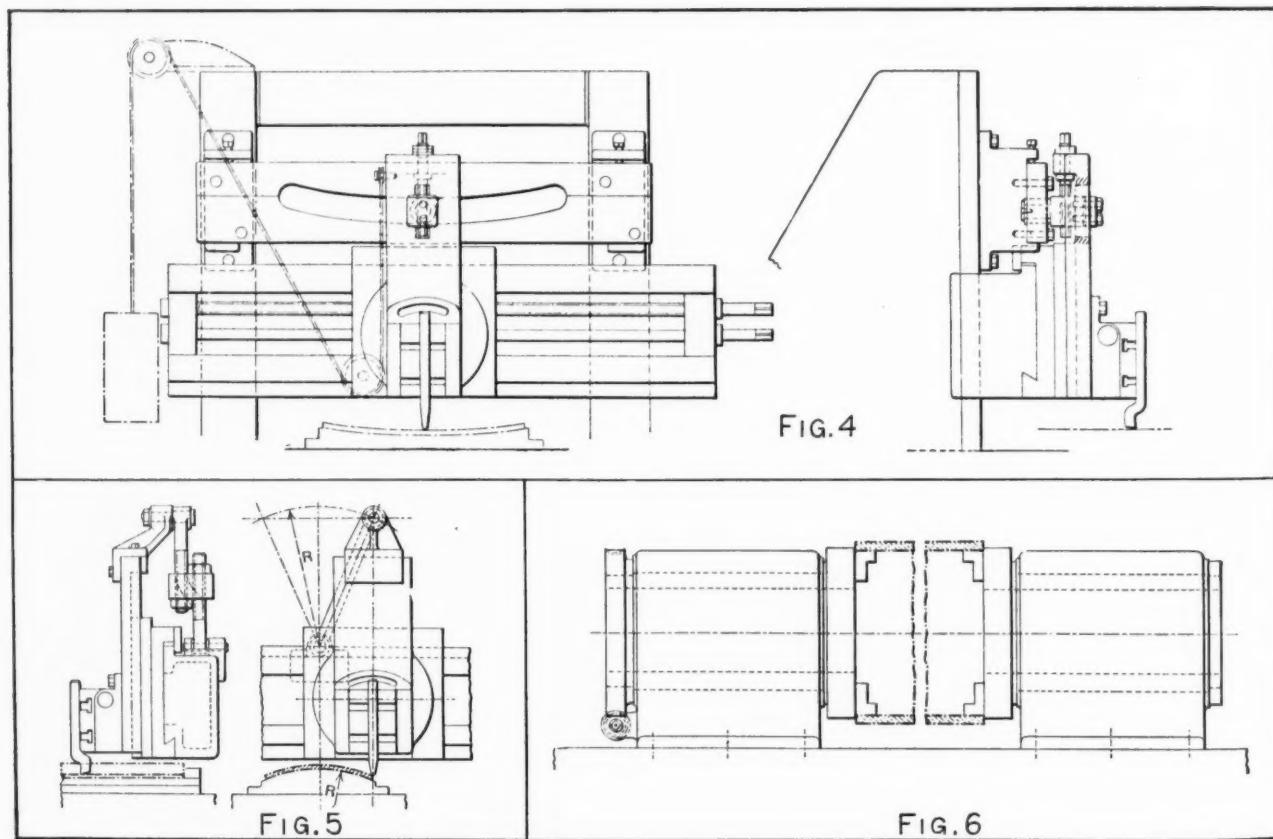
Planer with Former Plate Attachment for Machining Curved Surfaces of Large Radii or Irregular Surfaces. Fig. 5. Convex Planing Attachment with Radius-bar. Fig. 6. Fixture for Planing Cylindrical Work
